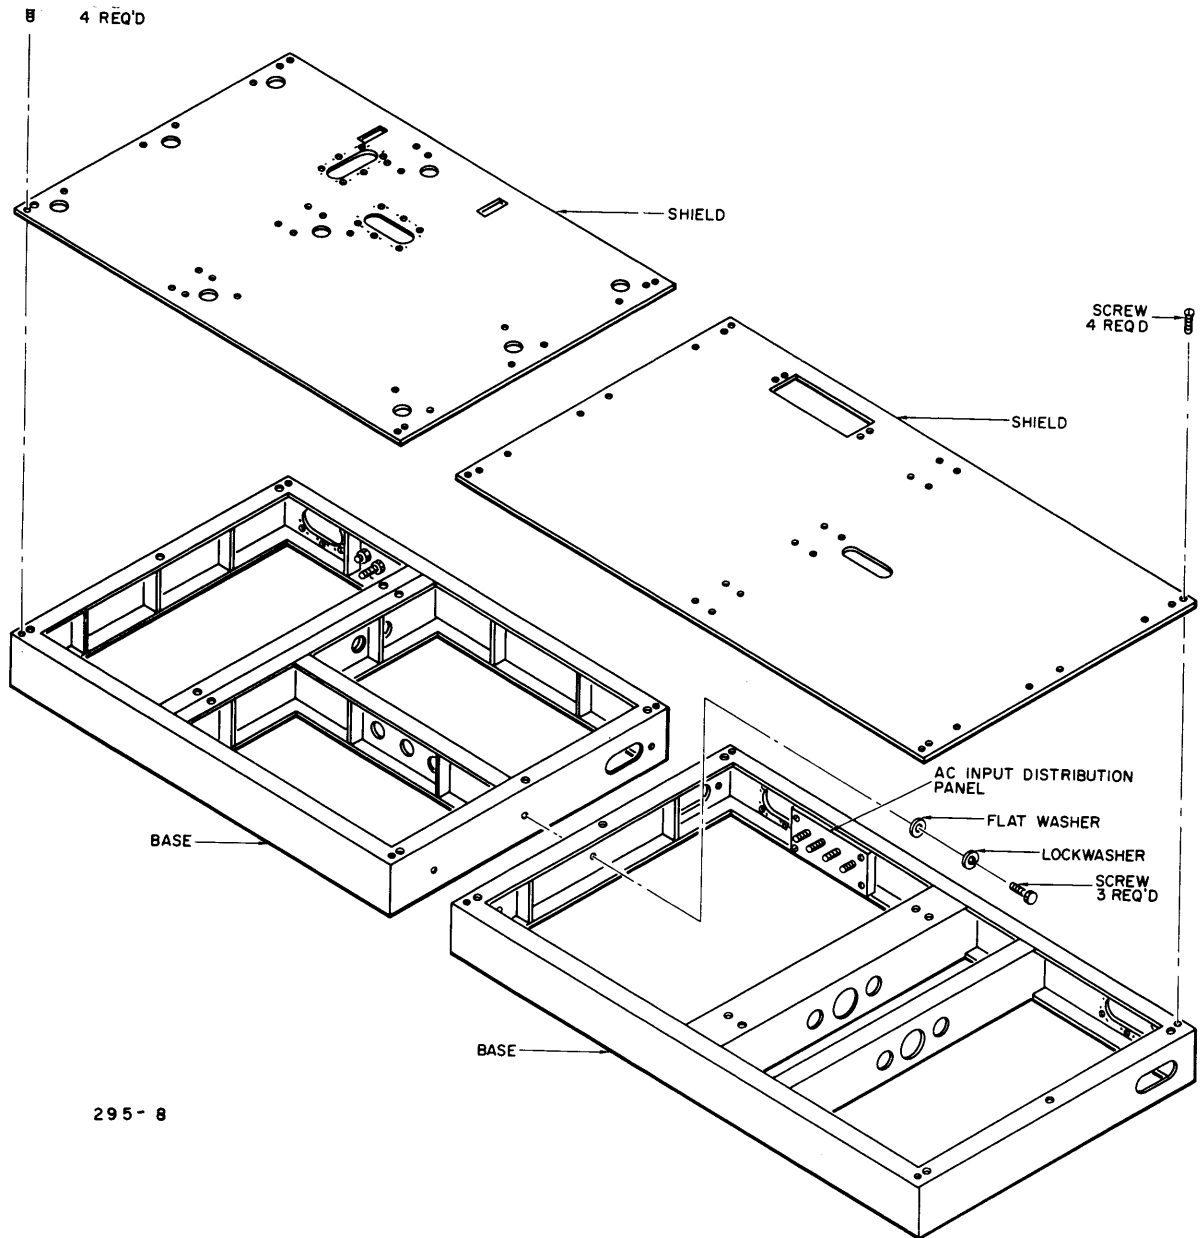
Base Assemblies for the First Through Fourth Frames, Installation Diagram.
